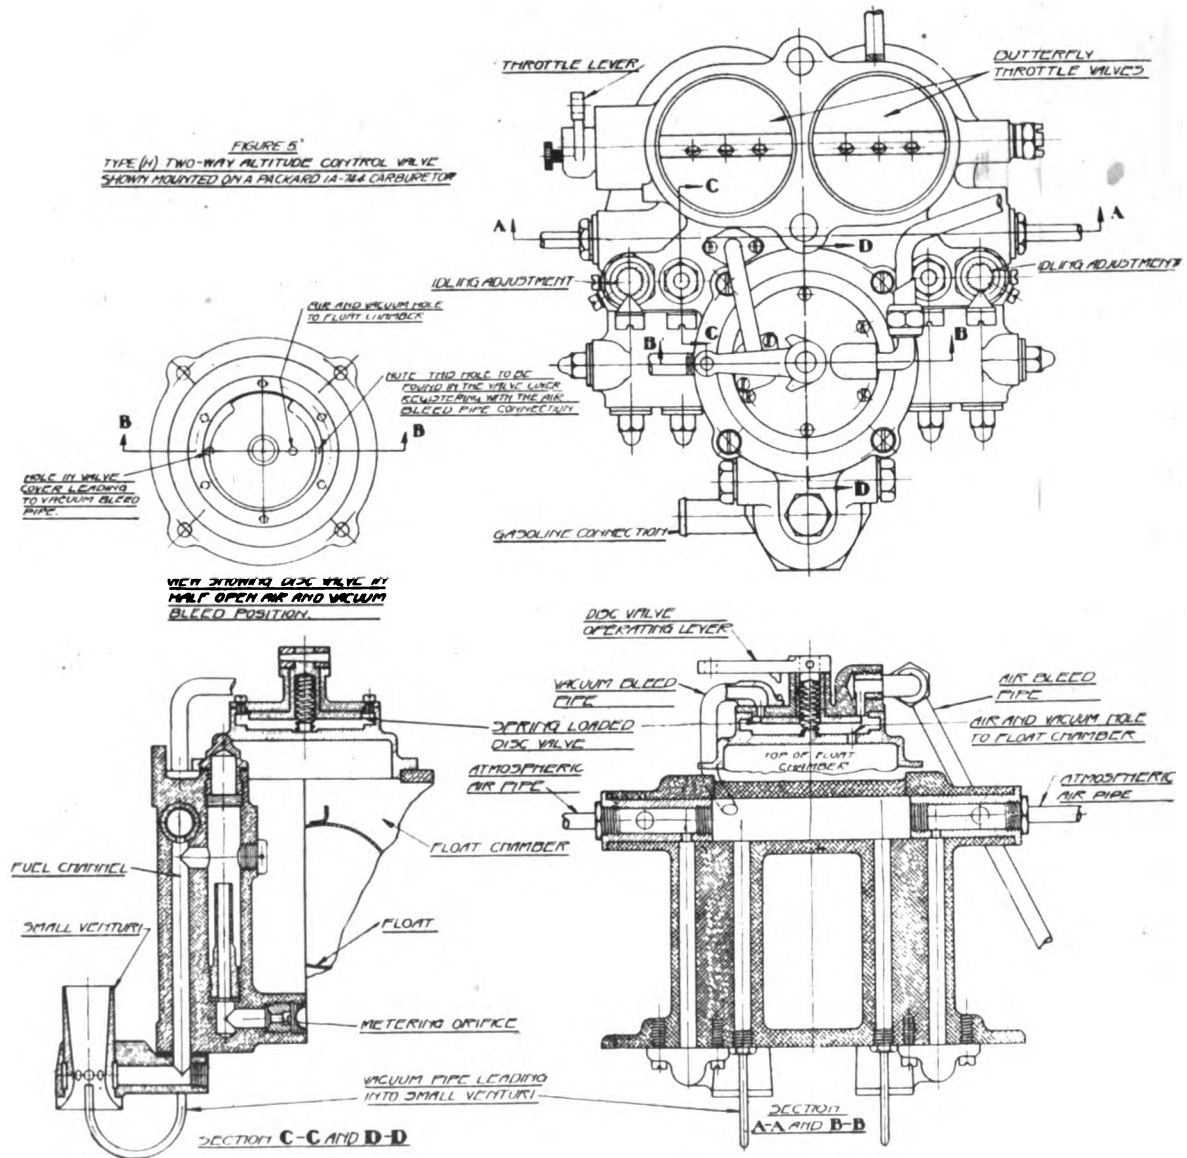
Type "H" two-way altitude control valve shown mounted on Packard 1A-744 carburetor.
